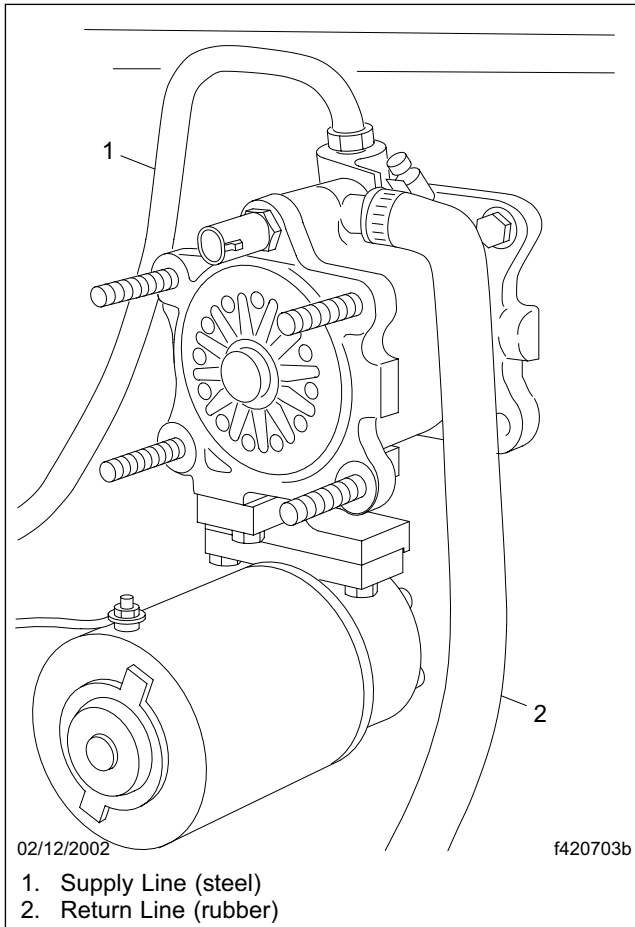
, Backup Pump Assembly (actual appearance may vary)
